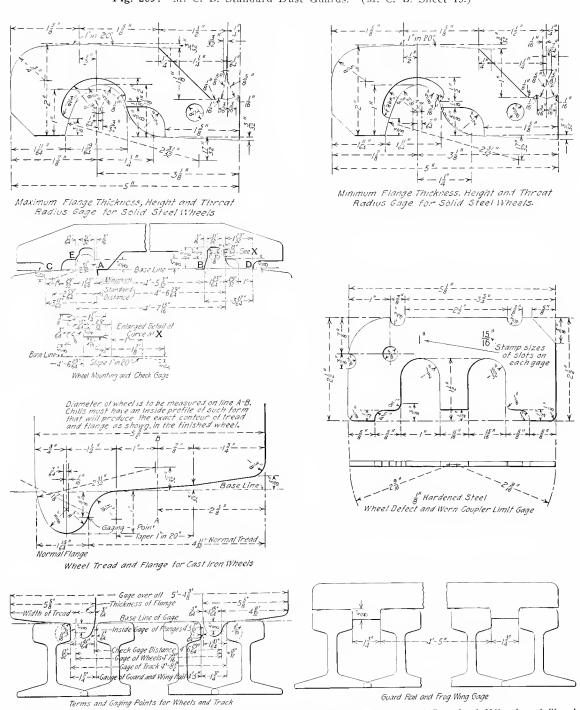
M. C. B. Standard Tread and Flange for Cast Iron Wheels; and Standard Wheel and Track Gages. (M. C. B. Sheet 16.)
